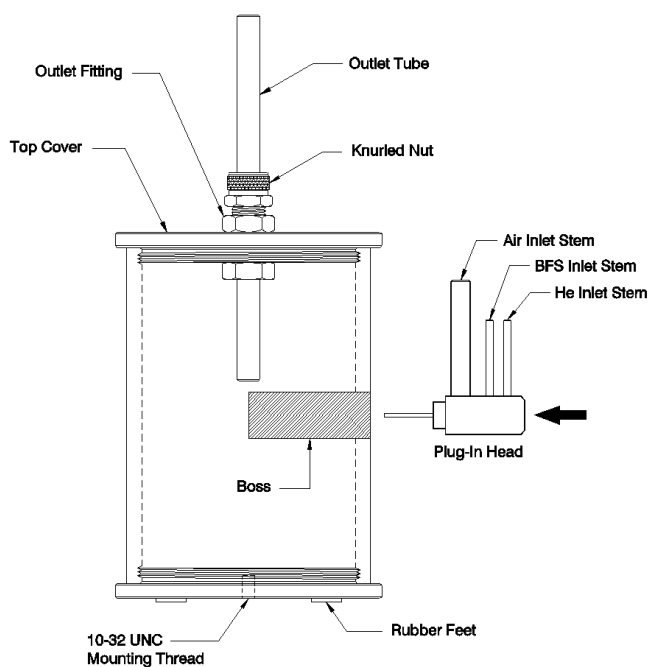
Mini-Vortex Filter and Plug-In Head assembly.
